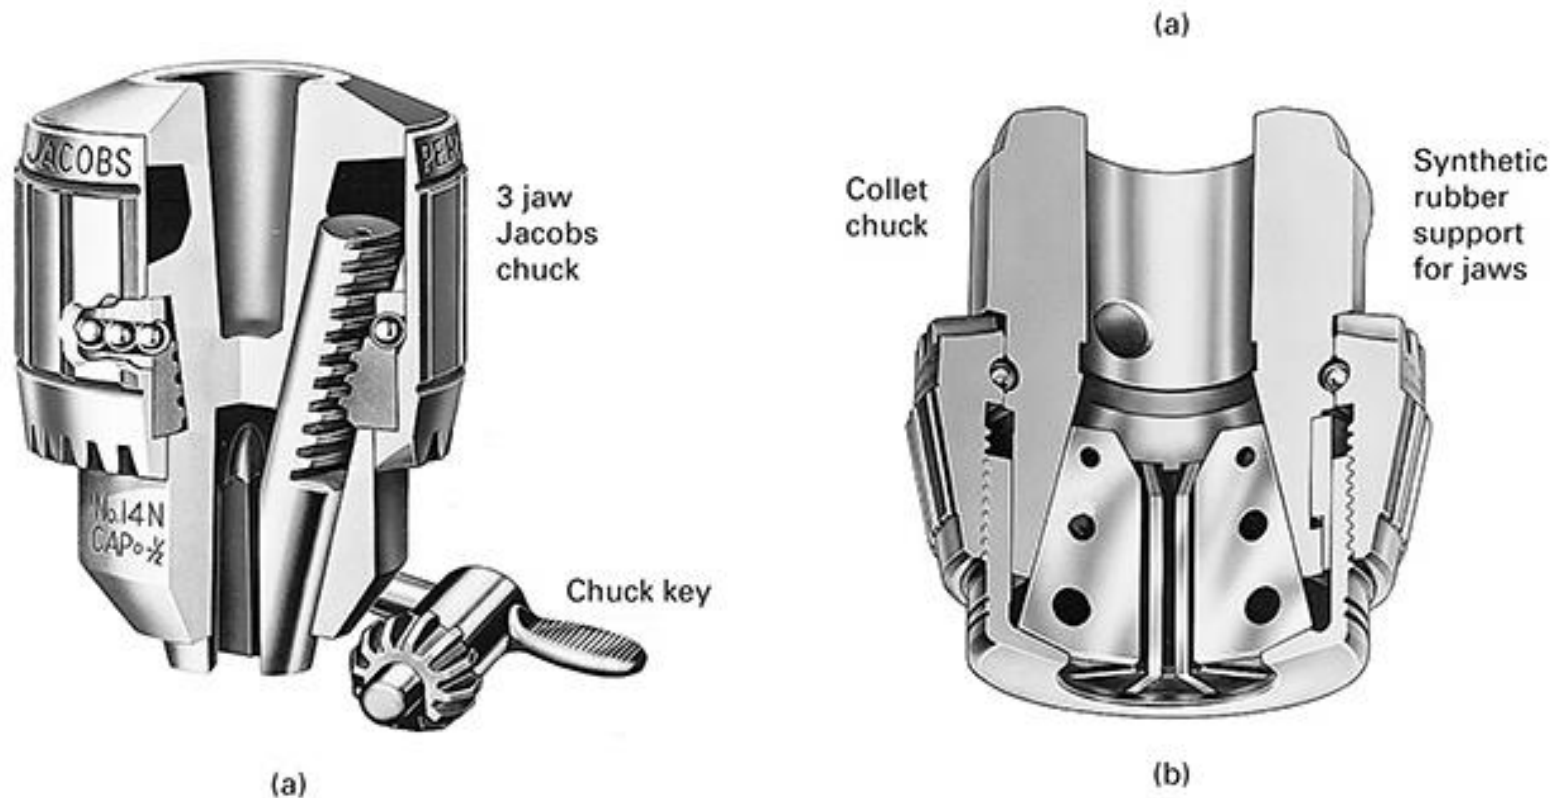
Two of the most commonly used types of drill chucks are the 3-jaw Jacobs chuck (above) and the collet chuck with synthetic rubber support for jaws. (Courtesy of Jacobs Manufacturing Company.)
